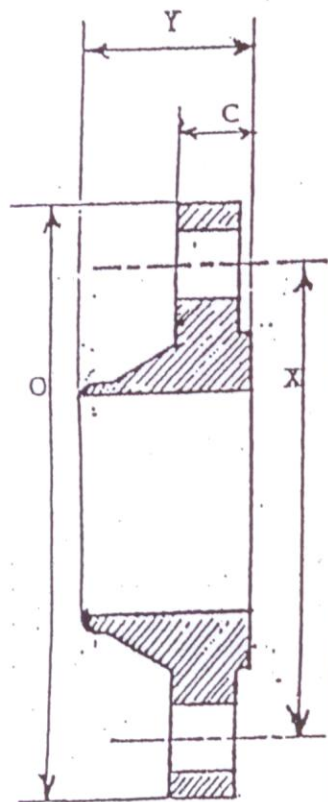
Socket weld flange. (Courtesy of Hackney, Inc., a division of Trinity Industries.)
